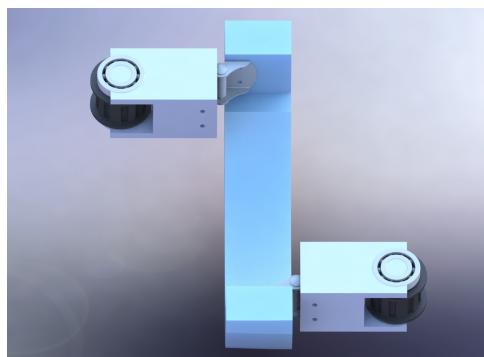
Rough CAD of what final assembly of belt tensioner should look like.
